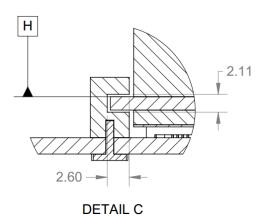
Large Form Factor Baseboard Chassis CTF Dimensions (Rail Guide – Detail C)
